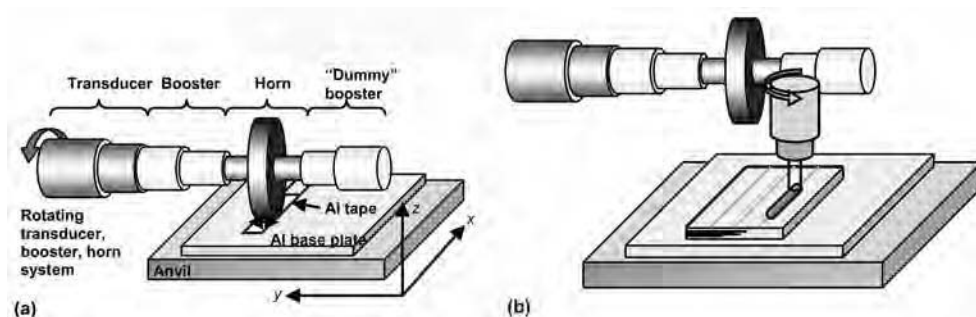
Ultrasonic additive manufacturing (UAM) process. (a) UAM welding system. (b) Machining operation
